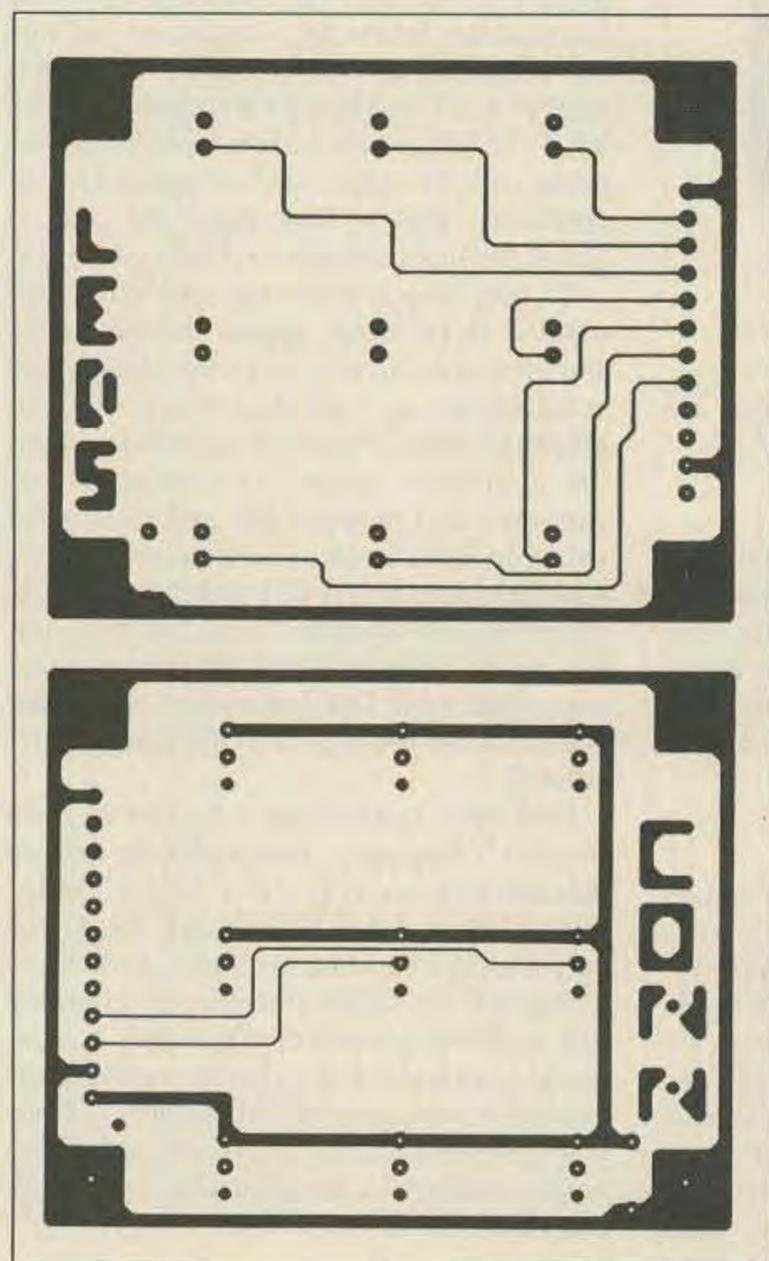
a) Top foil layout for the LED board. b) Bottom foil layout for the LED board.
